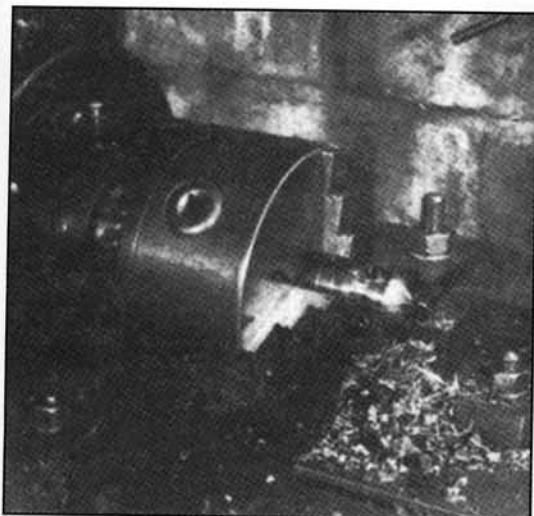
Fig. B. form turning a 3/4 in. dia ball in a single operation.
